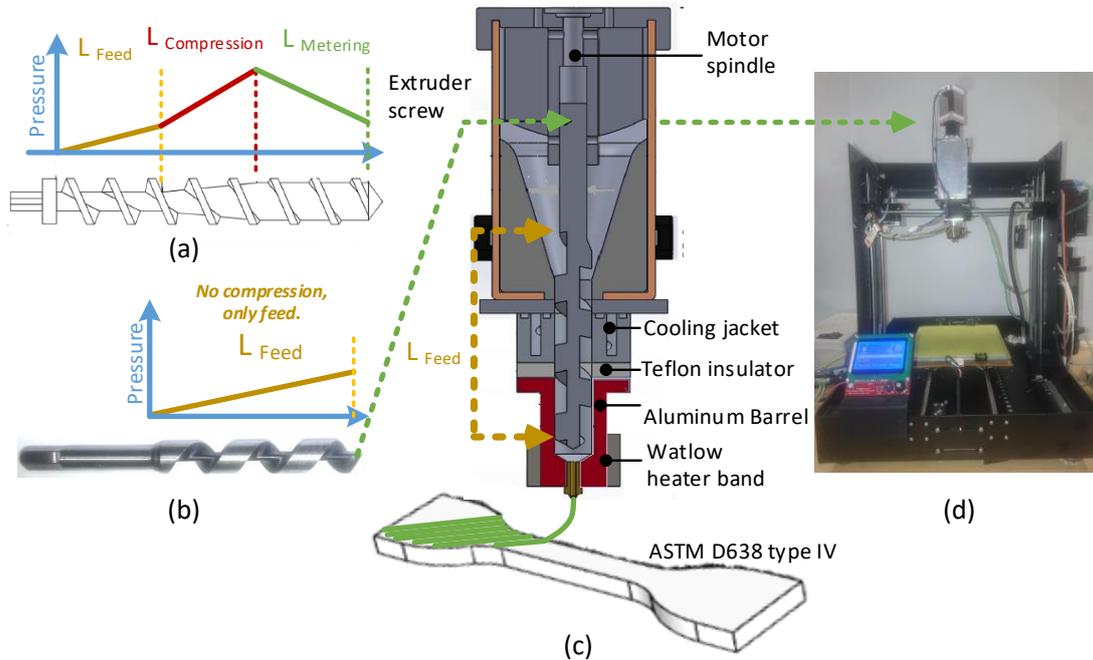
Pellet 3D printer: a) sections of conventional extrusion screw, b) section of a drill, c) illustration of different parts of the pellet extruder, and d) the pellet extrusion printer [73].
